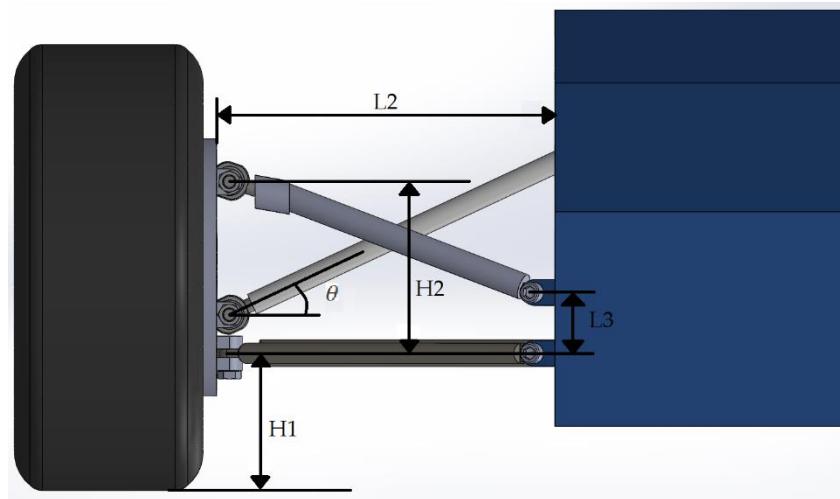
Geometrical Dimensions – Front View (Front Suspension).
